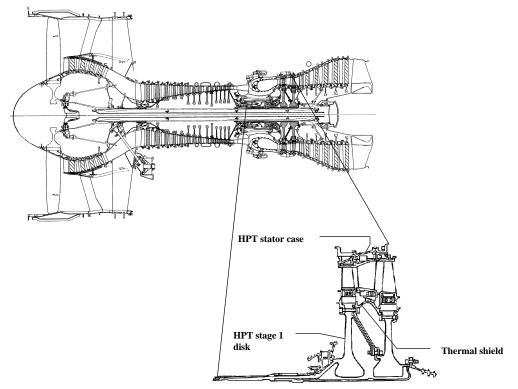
Cross-section of a GE CF6-802 engine and enlarged view of the HPT module
